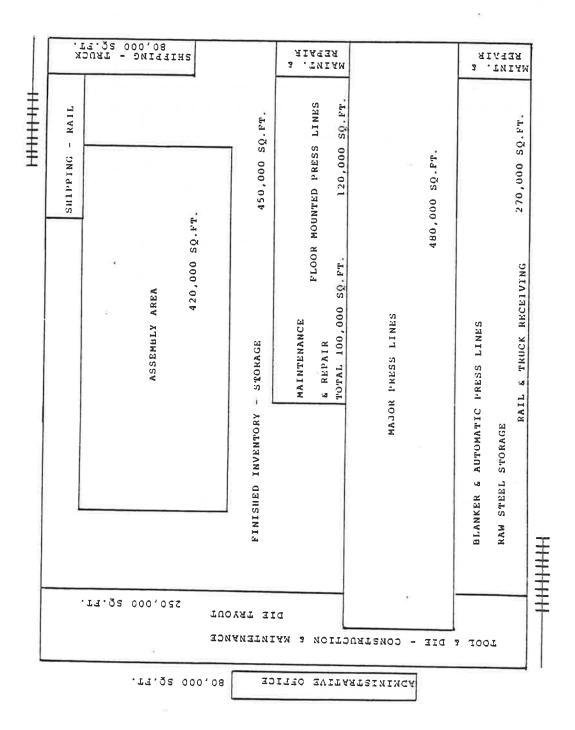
NEW STAMPING PLANT LAYOUT
